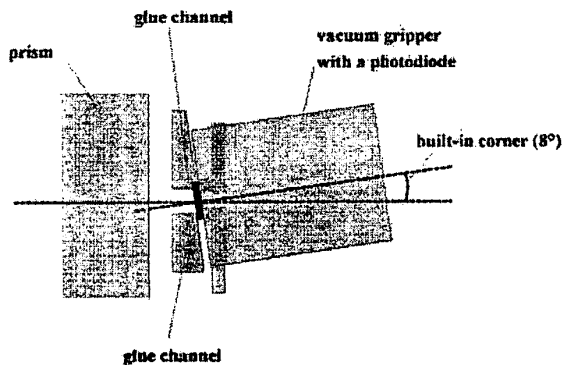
Assembling of the photodiodes with a vacuum gripper
